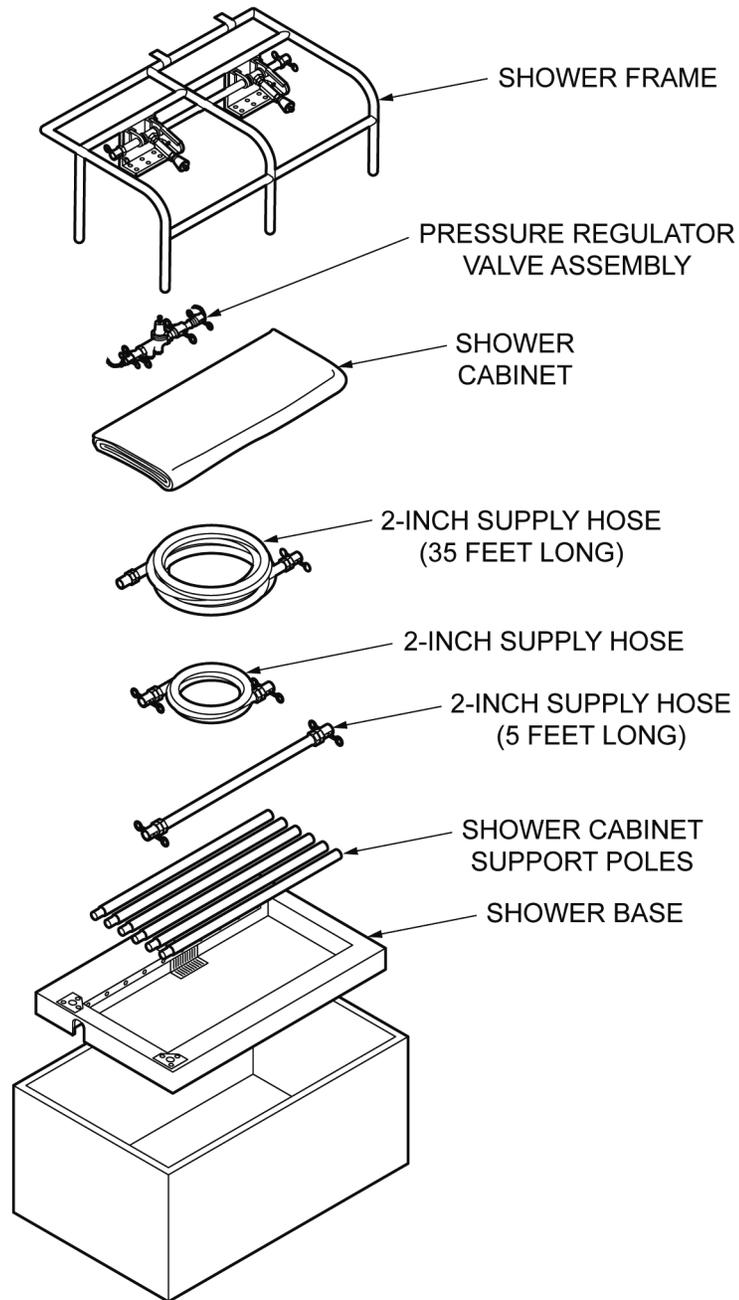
Packing the 12-Head Shower (Sheet 1 of 6).
